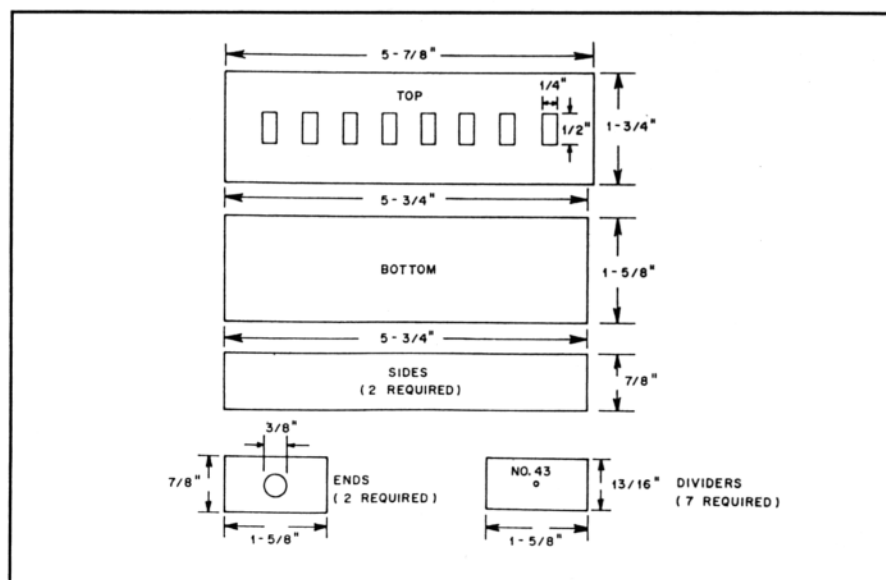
Attenuator enclosure dimensions. See the text for precautions on soldering.
